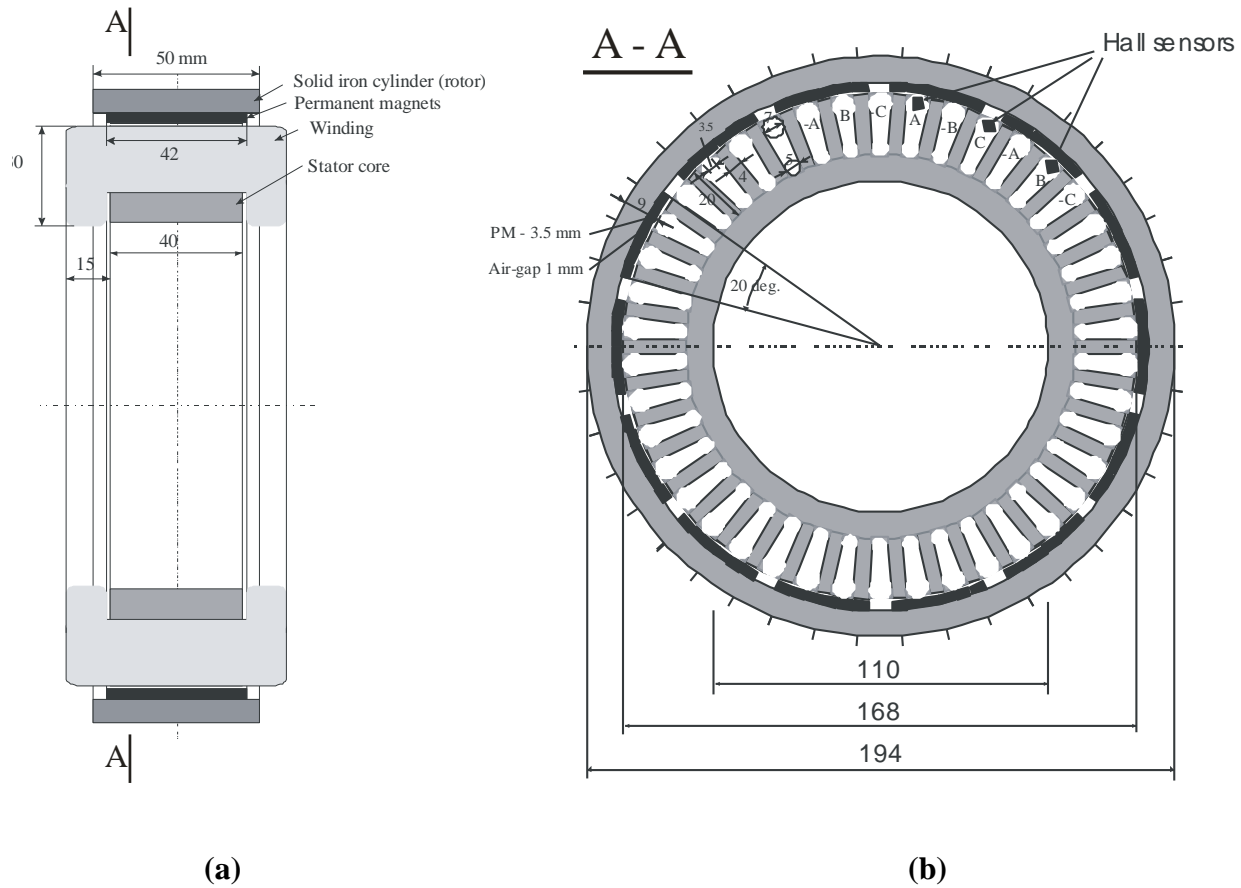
Scheme of conventional single-sided outer-rotor RFPM motor: (a) longitudinal cross-sectional view, (b) transverse cross-sectional view
